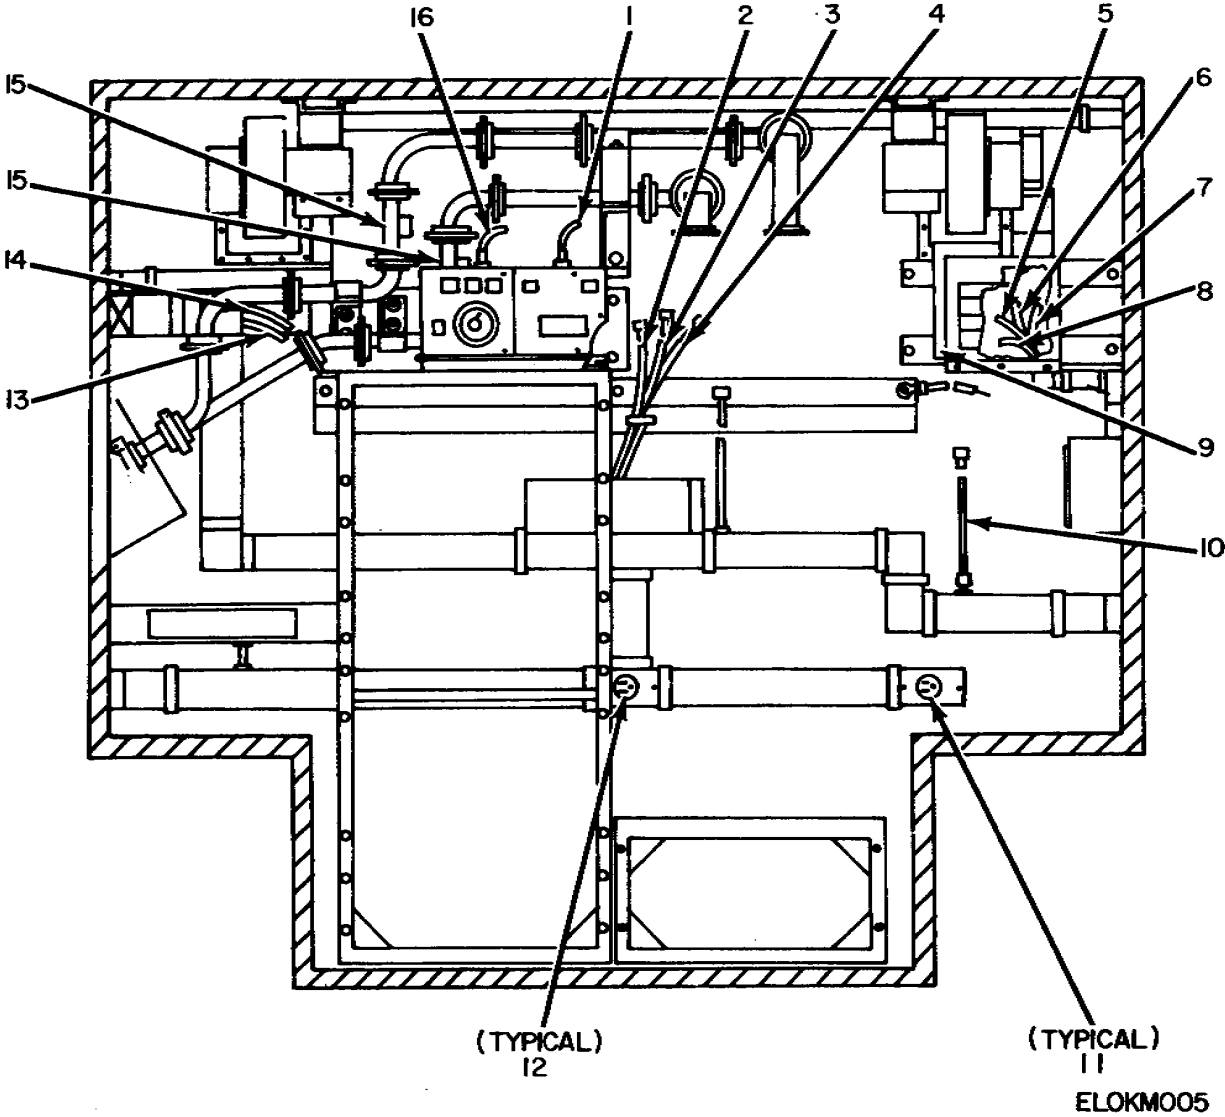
Shelter, Electrical Equipment S-336/TRC-112 Interior, Front View.
